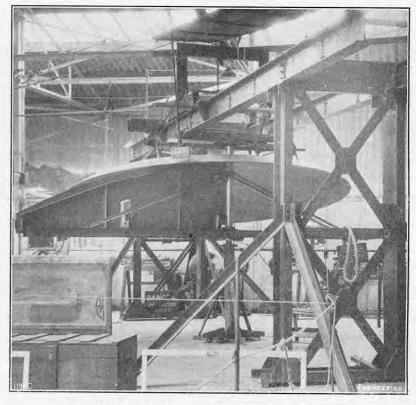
Profile-Checking Rig for Radar-Scanner.
